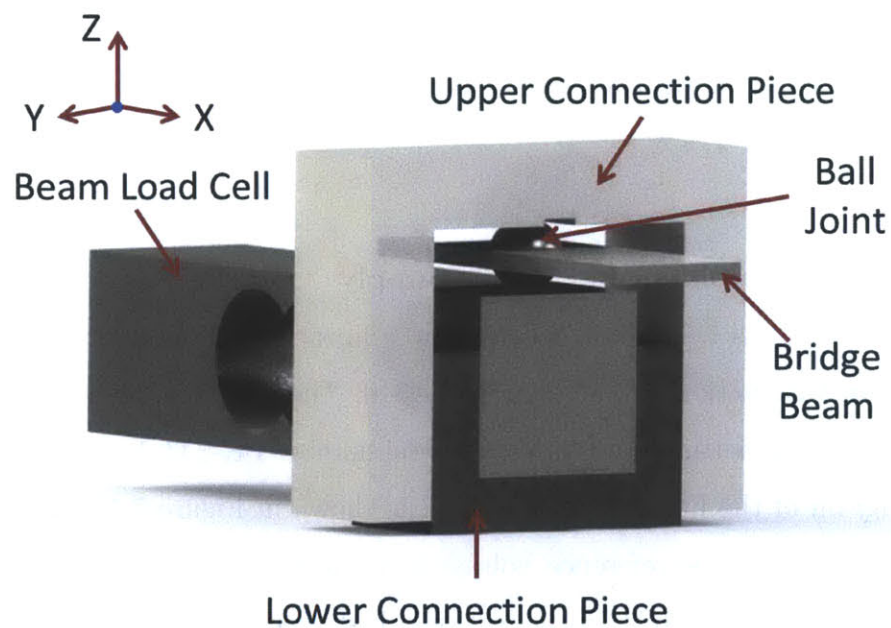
Ball joint fixture design. With the groove in the upper connection piece and the ball joint, the fixture constrains only the motions in the  $y$  and  $\theta_y$  directions.
